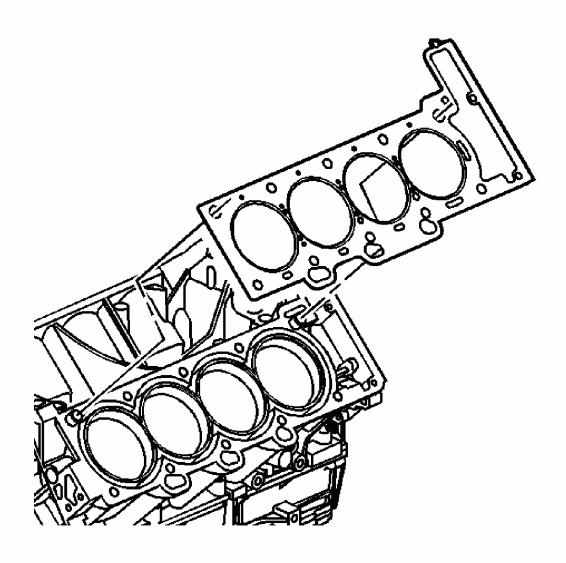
View of Right Cylinder Head Gasket Courtesy of GENERAL MOTORS CORP.
